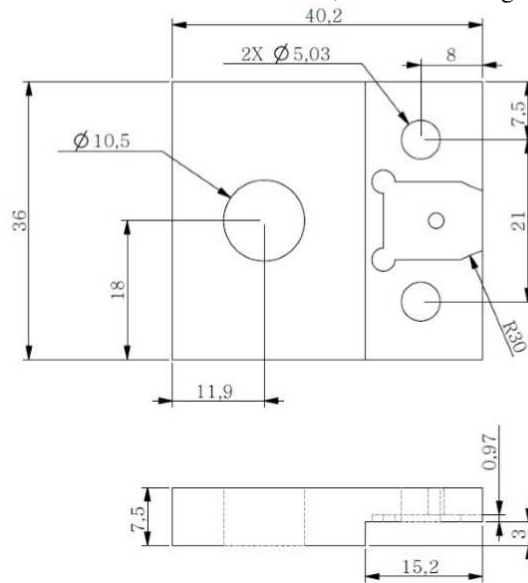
Dimensions of the specimen holder (all dimensions in mm)
